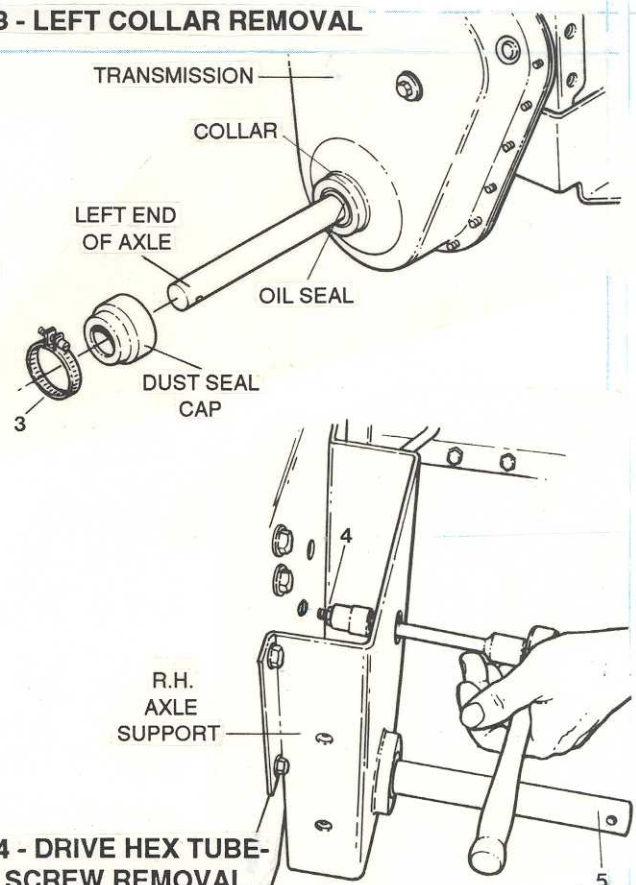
DRIVE HEX TUBE-SCREW REMOVAL
